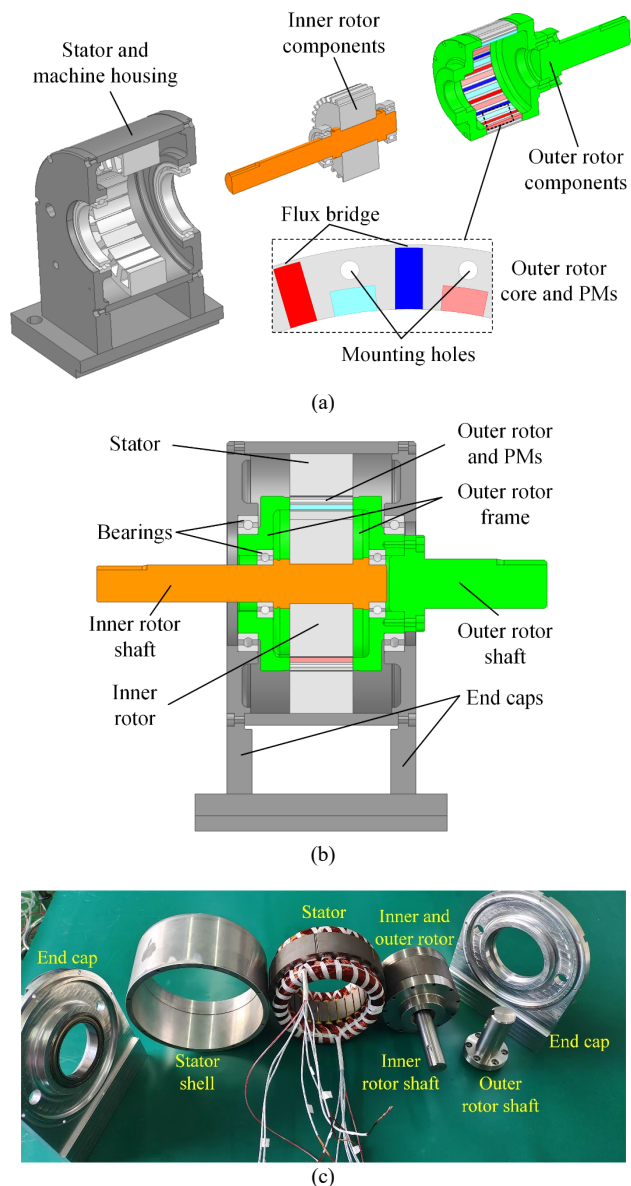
Prototype assembly. (a) Exploded view. (b) Cross section view. (c) Photos.
